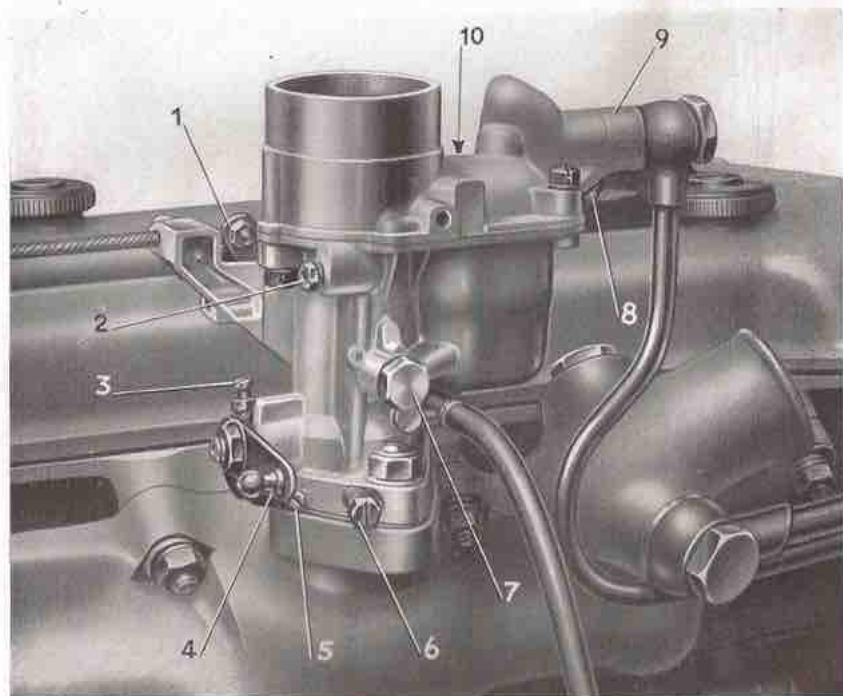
Solex type 32 BIC carburettor (Giulietta).
